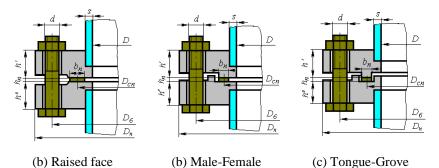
Flat welded flanges according to GOST 28759.2-90
